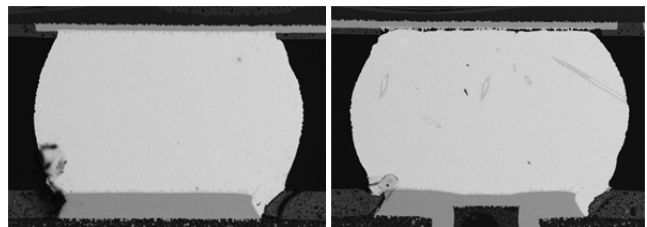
Comparison of with (left) and without (right) Solder detachment from the pad on package side
